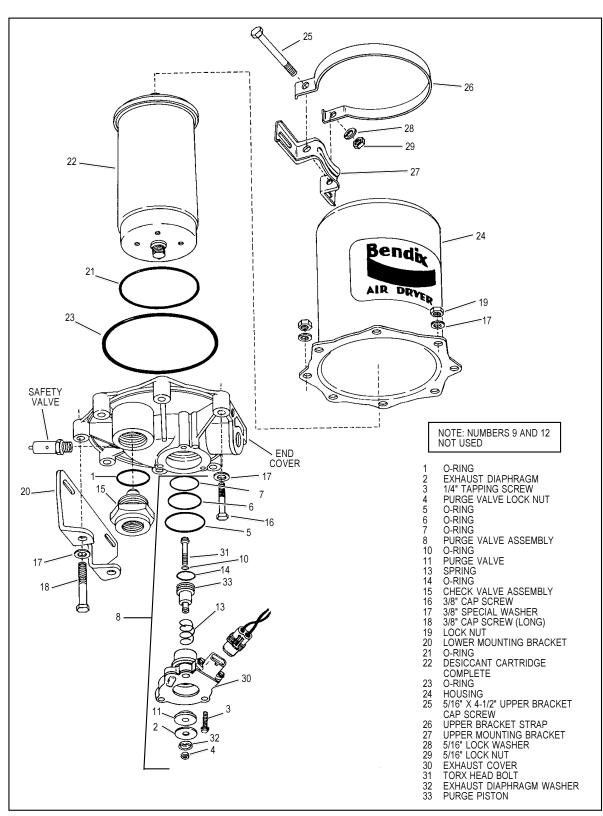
AD-9 AIR DRYER ASSEMBLY
